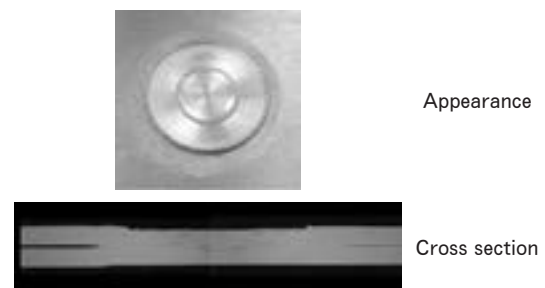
Friction Stir Spot Welding joint without hole and flash (6000 series alloy sheets for automobile body)⁴⁹⁾.
